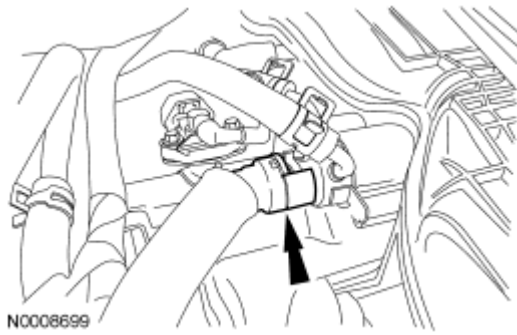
Locating Quick Connect Crankcase Vent Hose
